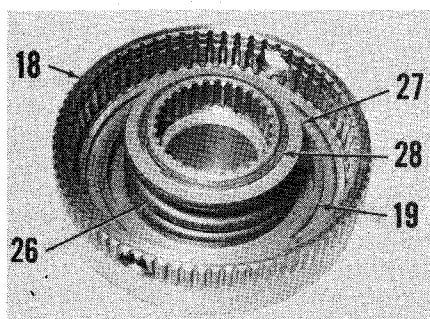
Special Nuday tool No. 1312 is used to press against spring retainer (27) to reduce spring tension on snap ring (28) so that it may be removed. Refer to Fig. 142 for identification.
